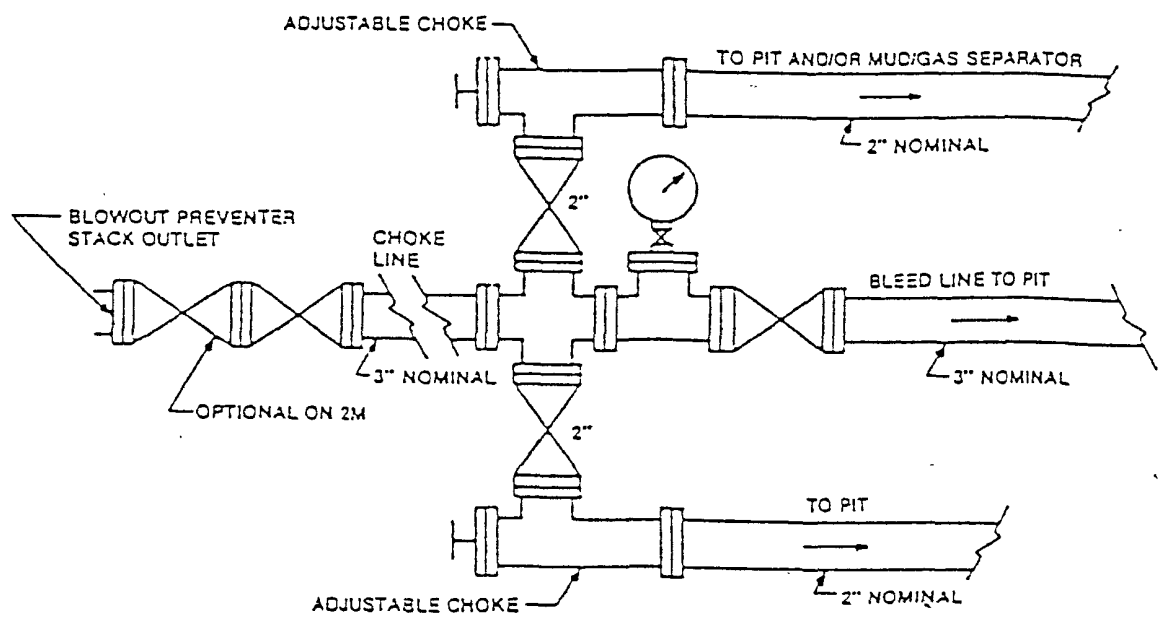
Typical choke manifold assembly for 2M and 3M rated working pressure service — surface installation.
